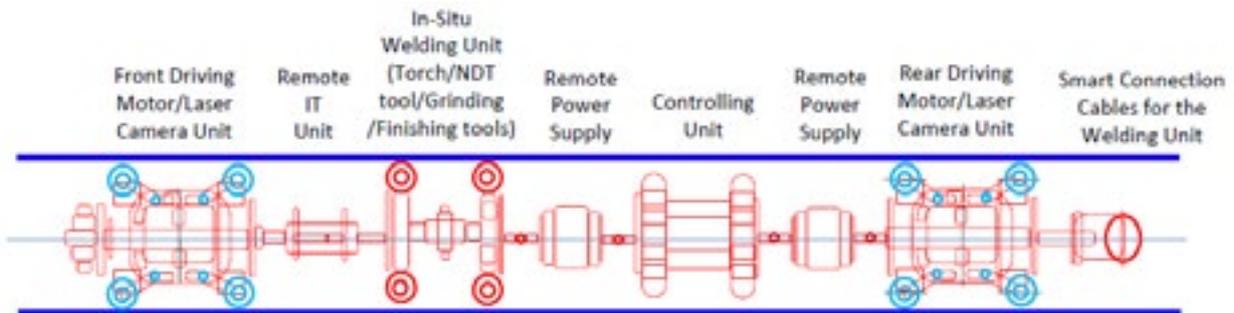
Colorado School of Mines Module; In-Situ Repair Welding Robot.
